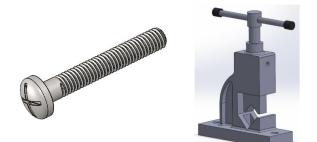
Example of the third test: Task 1 – Create appropriate machine element; Task 2 – Create assembly based on the given components
